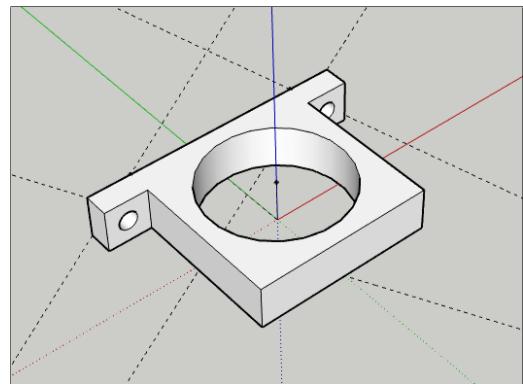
Small plastic mounts designed to house the bearings and attach them securely to the vehicle chassis.
